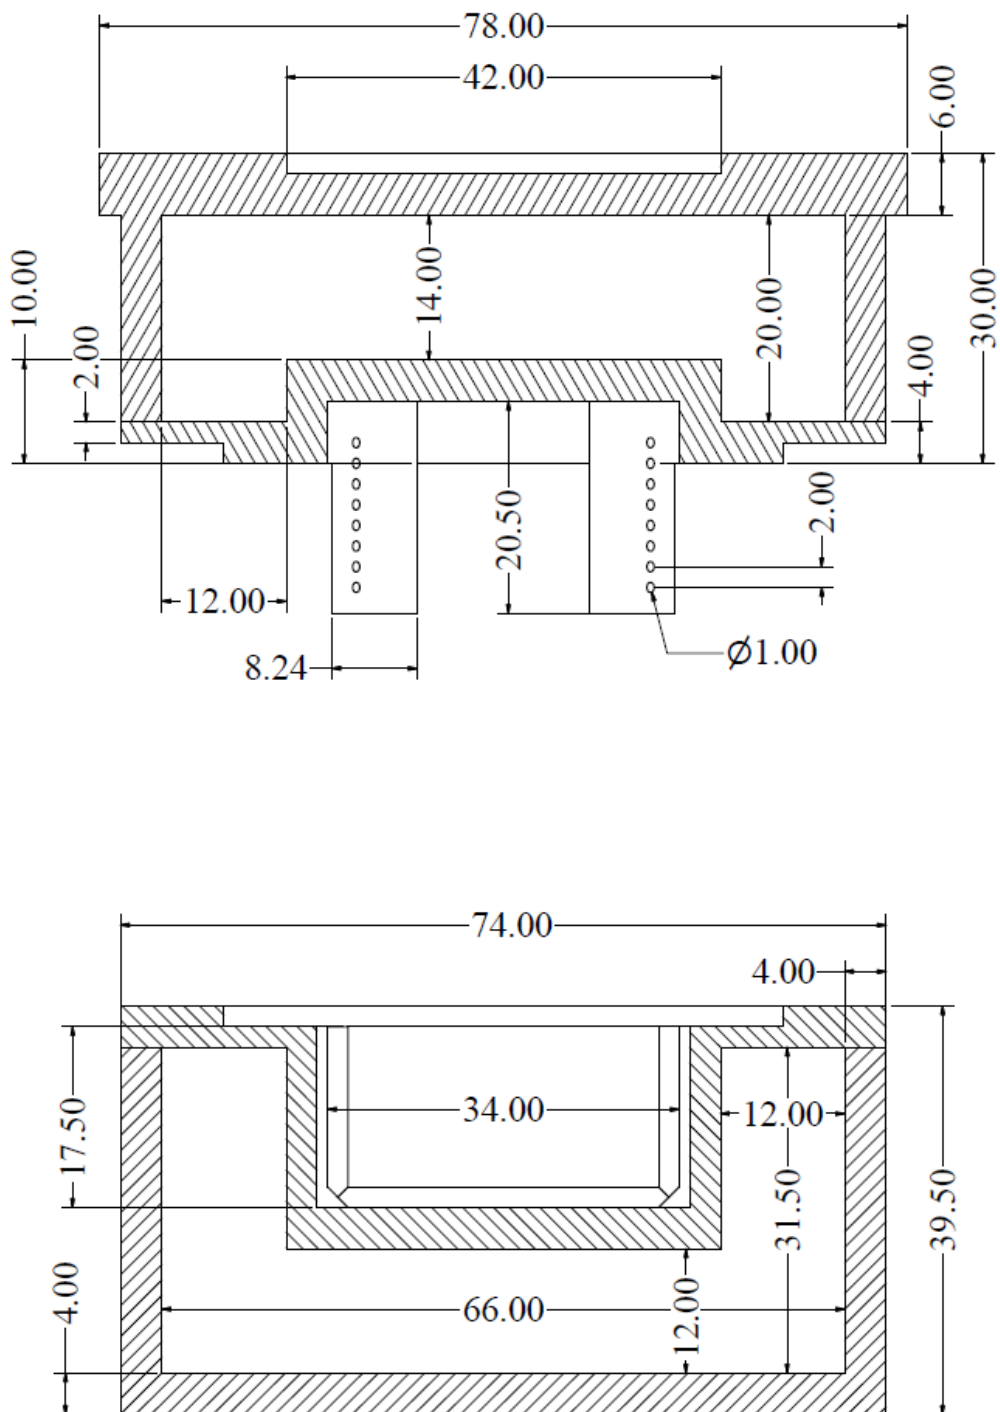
2D sectional drawing correspondent to the peloid sample holder: front view (4 column with holes (1.0 mm diameter) support the Ni-Cr wire).
